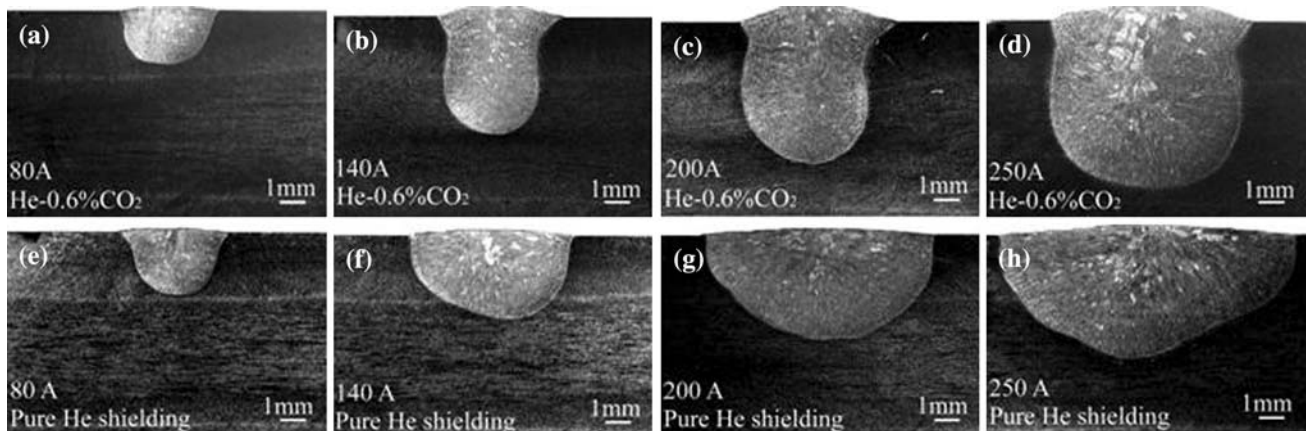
Weld shapes at different welding current for pure He and He–0.6%CO₂ shielding gases
